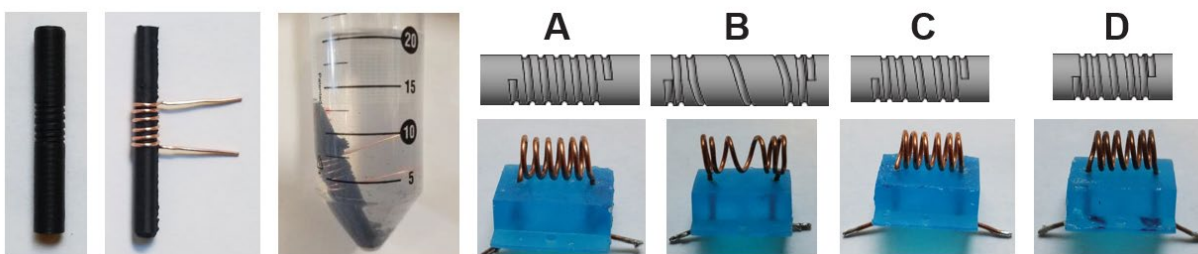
Shown is a 3D printed DIAPER made from ABS. Copper wire is wrapped around the template to form the coil. This assembly is soaked in acetone for several hours until the polymer is partially dissolved. CAD designs for the forms and recovered coils are shown from left to right: A) constant, B) “ideal”, C) model D) ratio.
